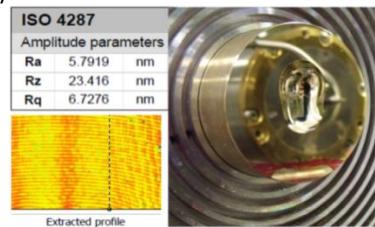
Ultra-precision “peanut shape” mold machining with in-process tool change [9]
